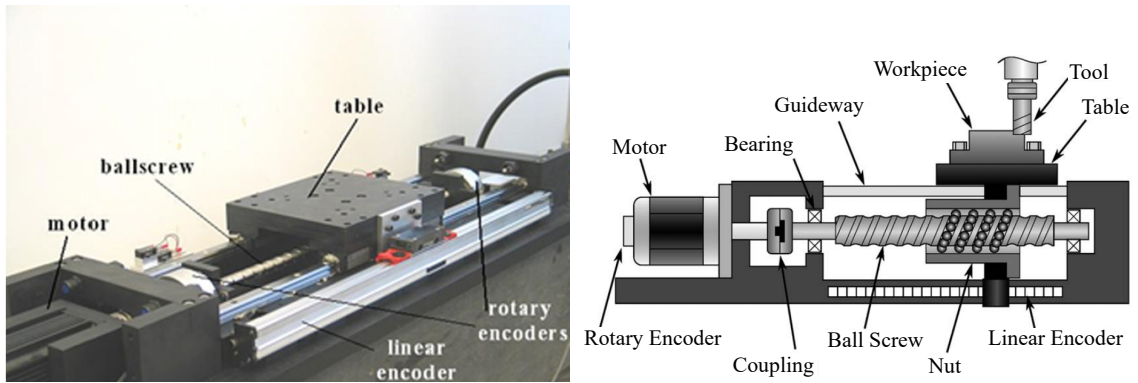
A Single-Axis Ball Screw Feed Drive [17]. Schematic of Components of a Typical Ball Screw Feed Drive [18].
